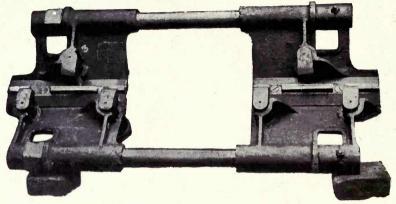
Underside of Rail Clamp for Welding High Carbon Rails.
